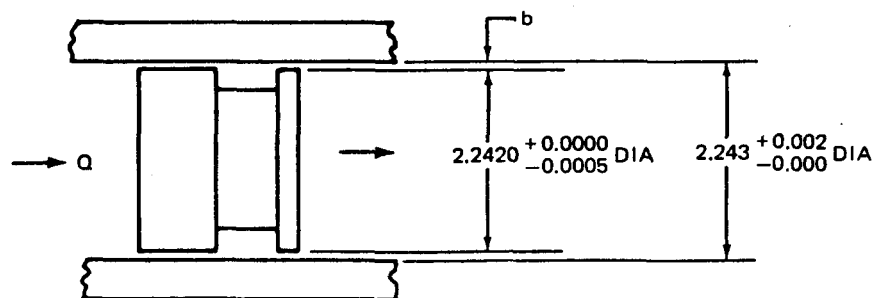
VALVE ANNULUS DIMENSIONS
